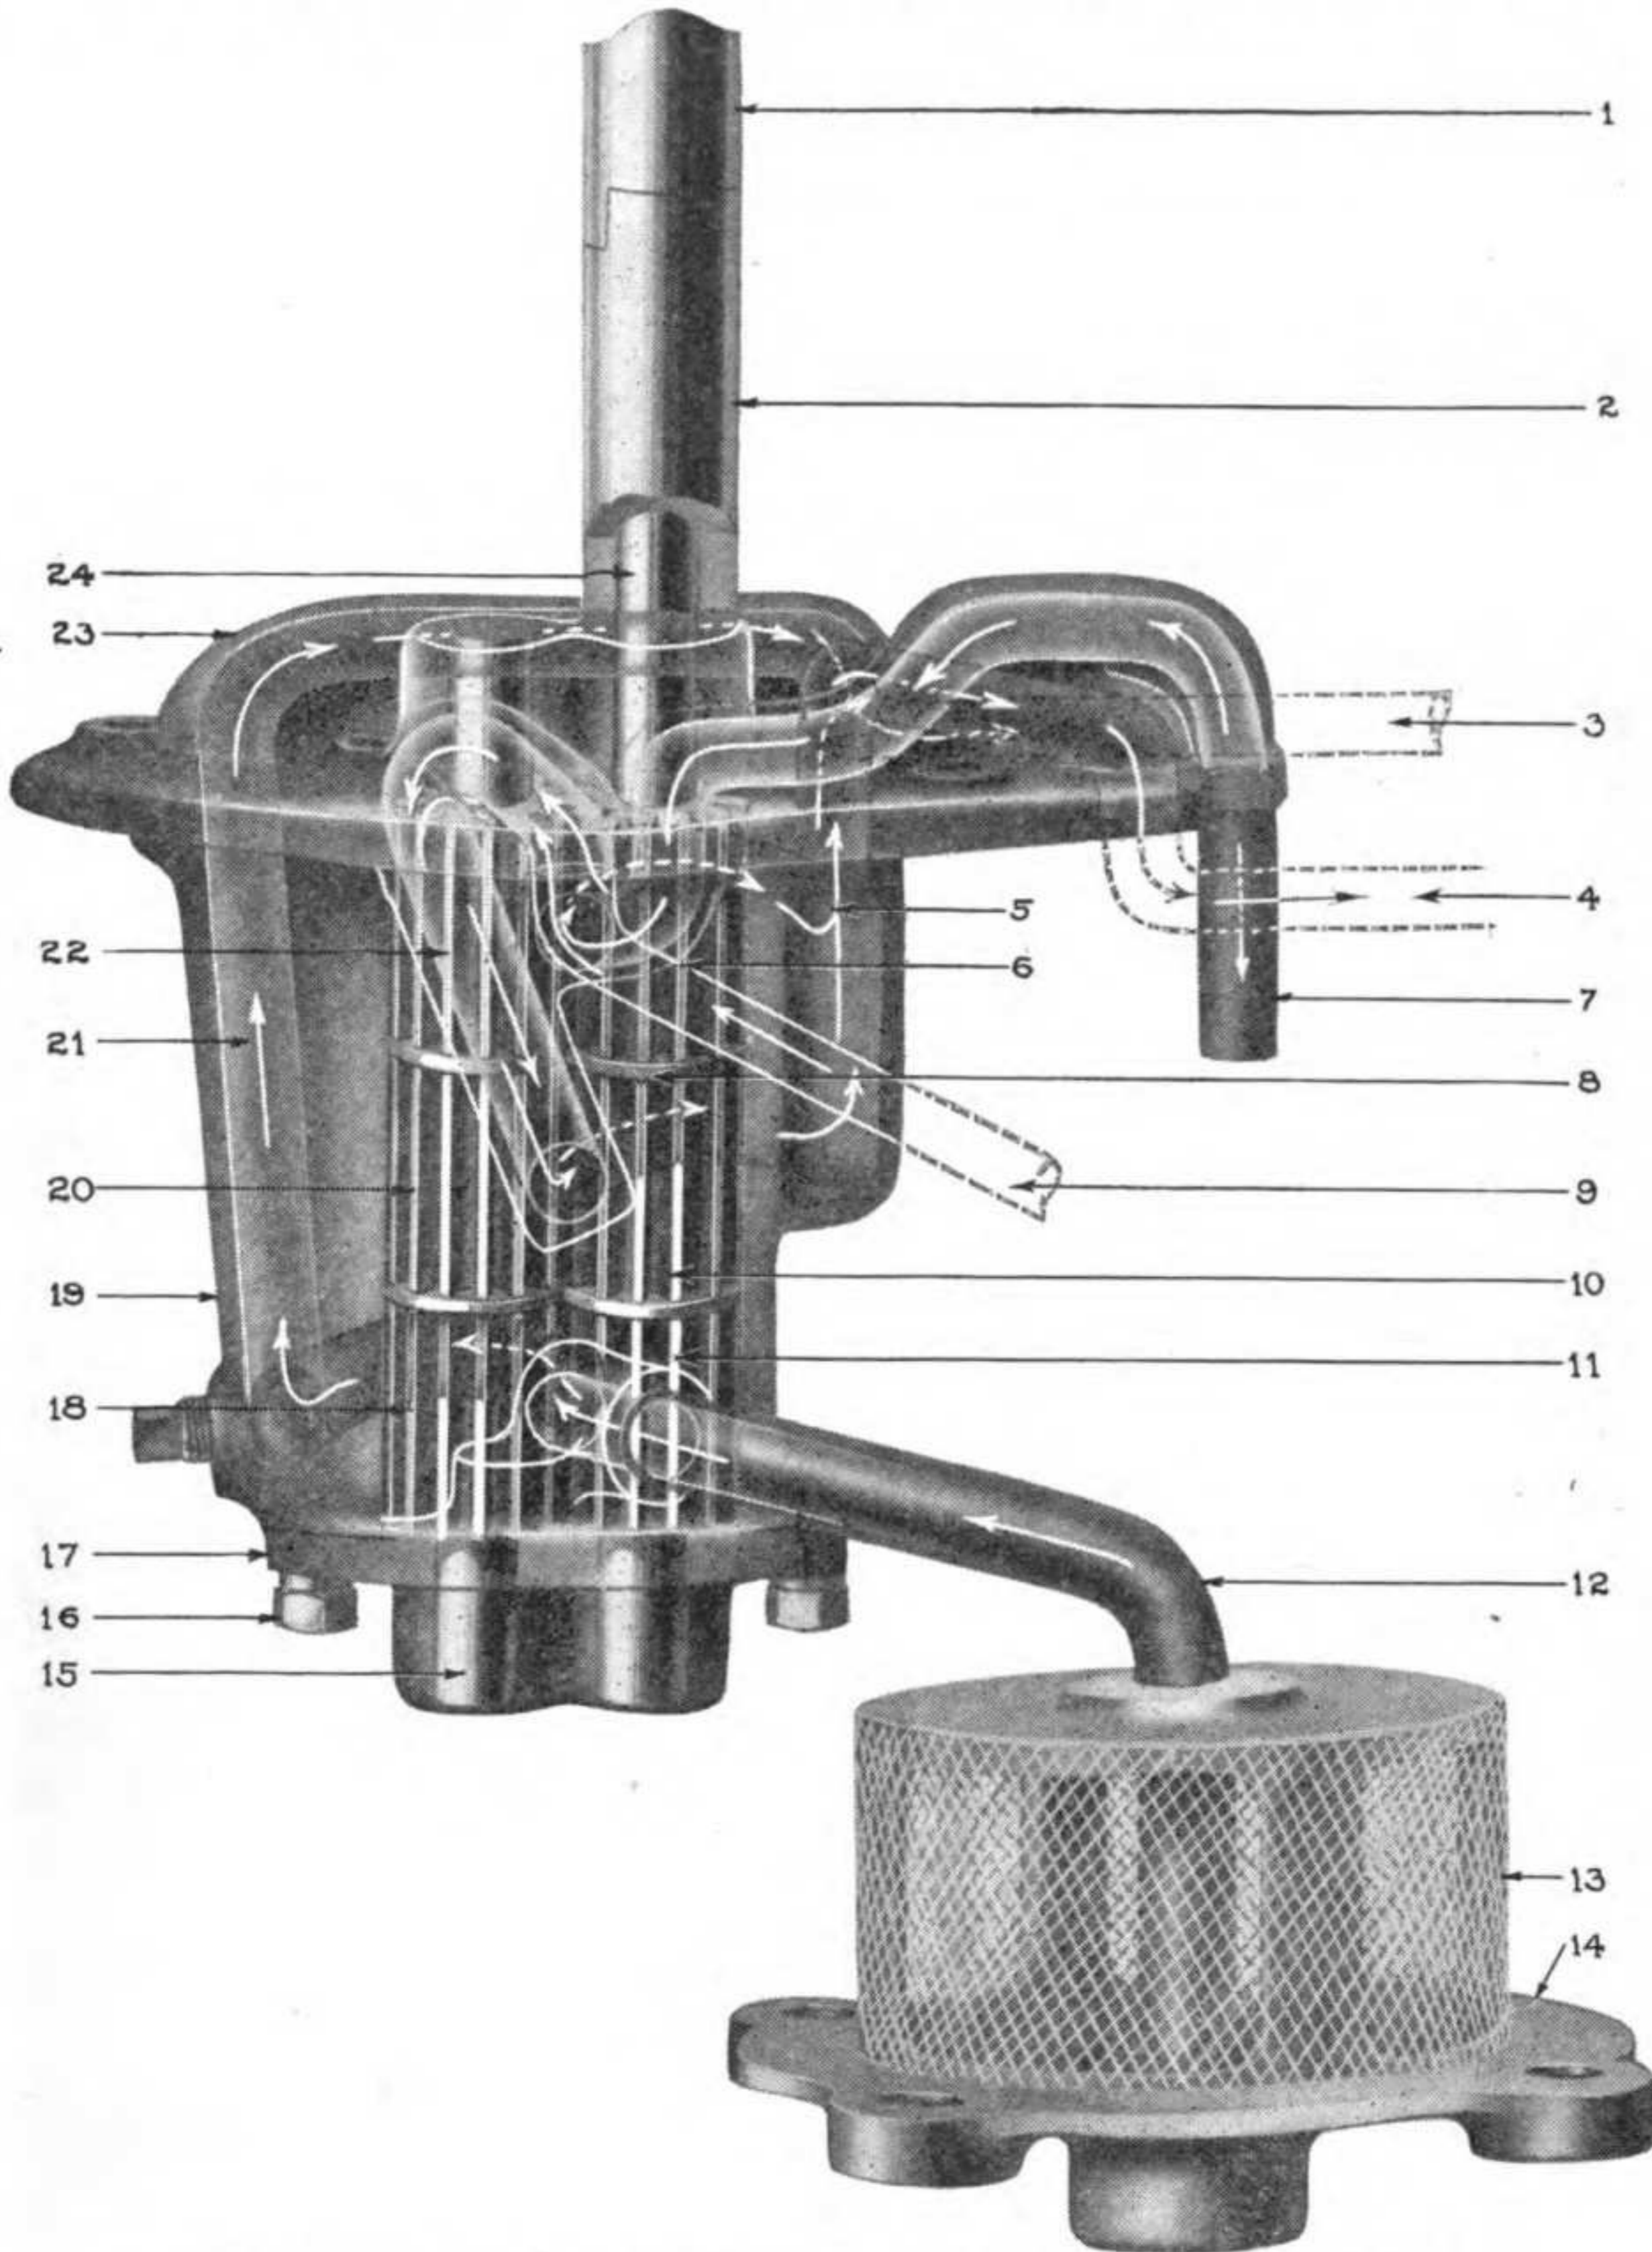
PHANTOM DRAWING OF OIL PUMP
